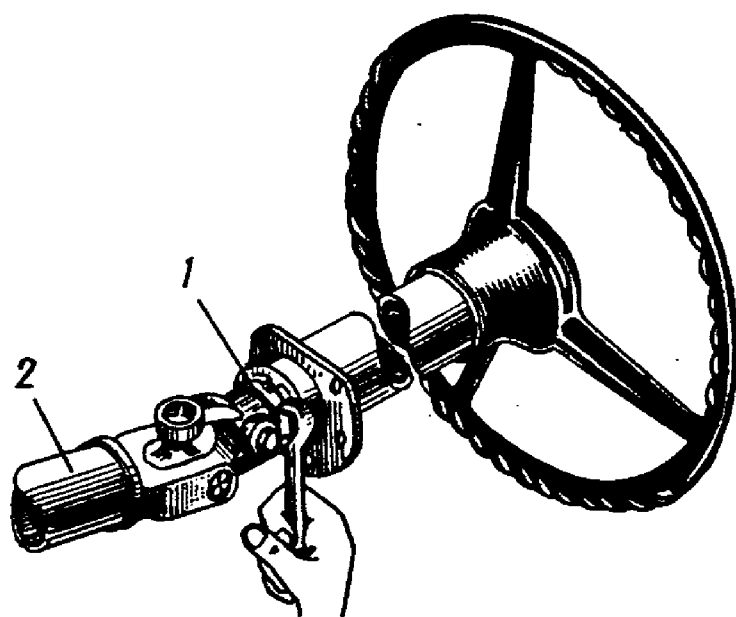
STEERING WHEEL END PLAY ADJUSTMENT
